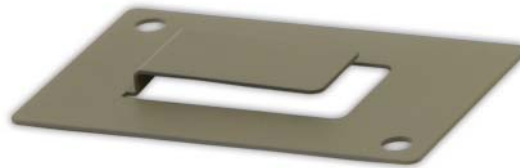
Optional mounting bracket (p/n 10-587302-21)
